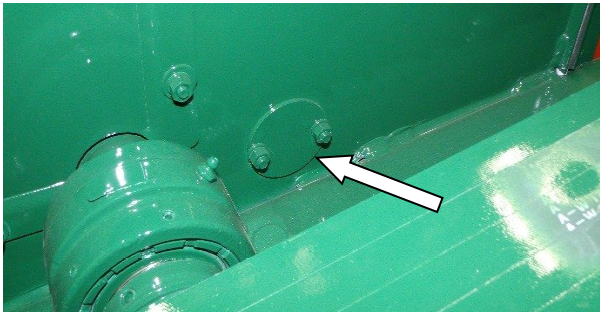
Hammer mill Removal Hole, Plate To Be Removed (Shields Removed For Clarity).
